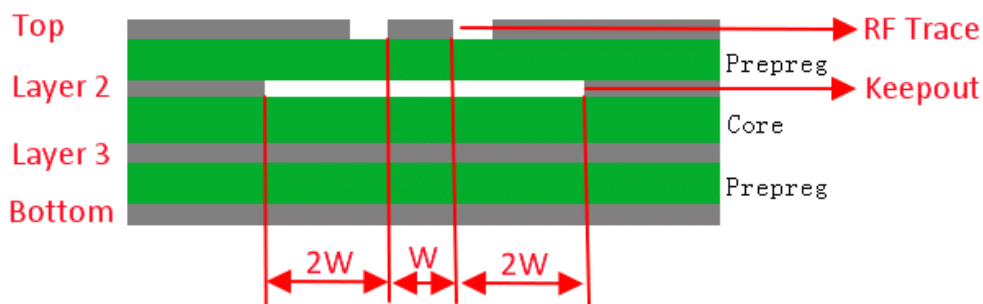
LAYOUT Diagram of Four Layers PCB (Reference Grounding is the 3rd Layer)
